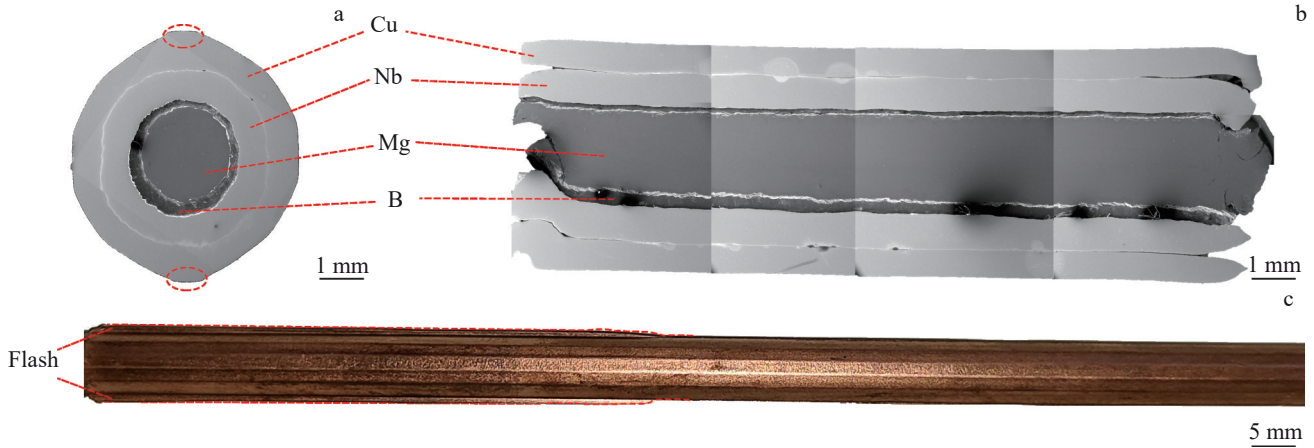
SEM transverse section (a) and longitudinal section (b) of IMD-MgB₂ superconducting wire after rolling; appearance of IMD-MgB₂ superconducting wire after rolling (c)
